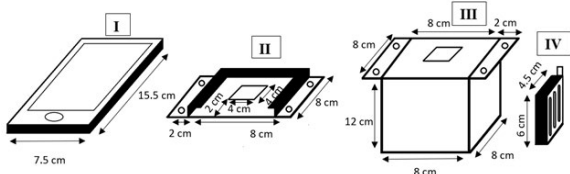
Design details of the parts consisting of the developed apparatus.
